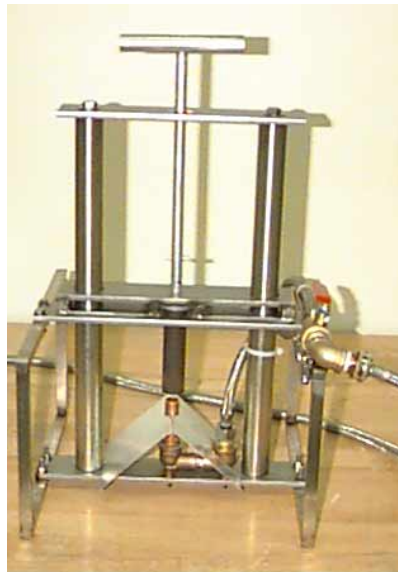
Student-designed Jominy hardenability test fixture. Tank removed for better clarity.
